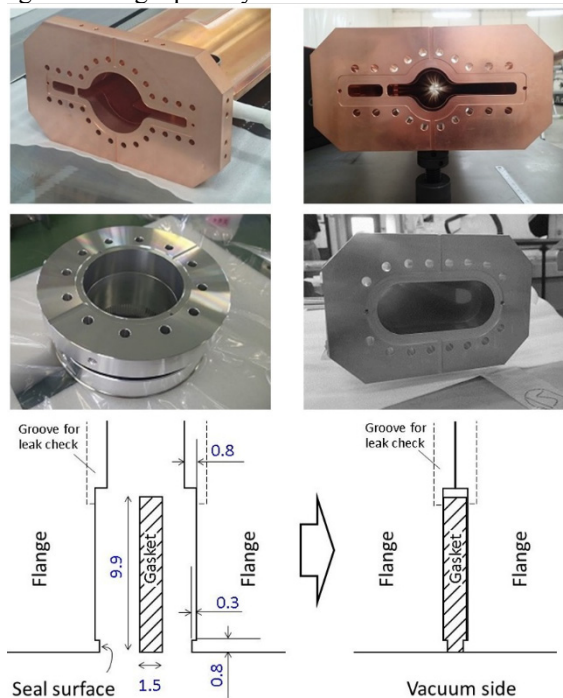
Several types of the step-less MO-type flanges of the SuperKEKB.
